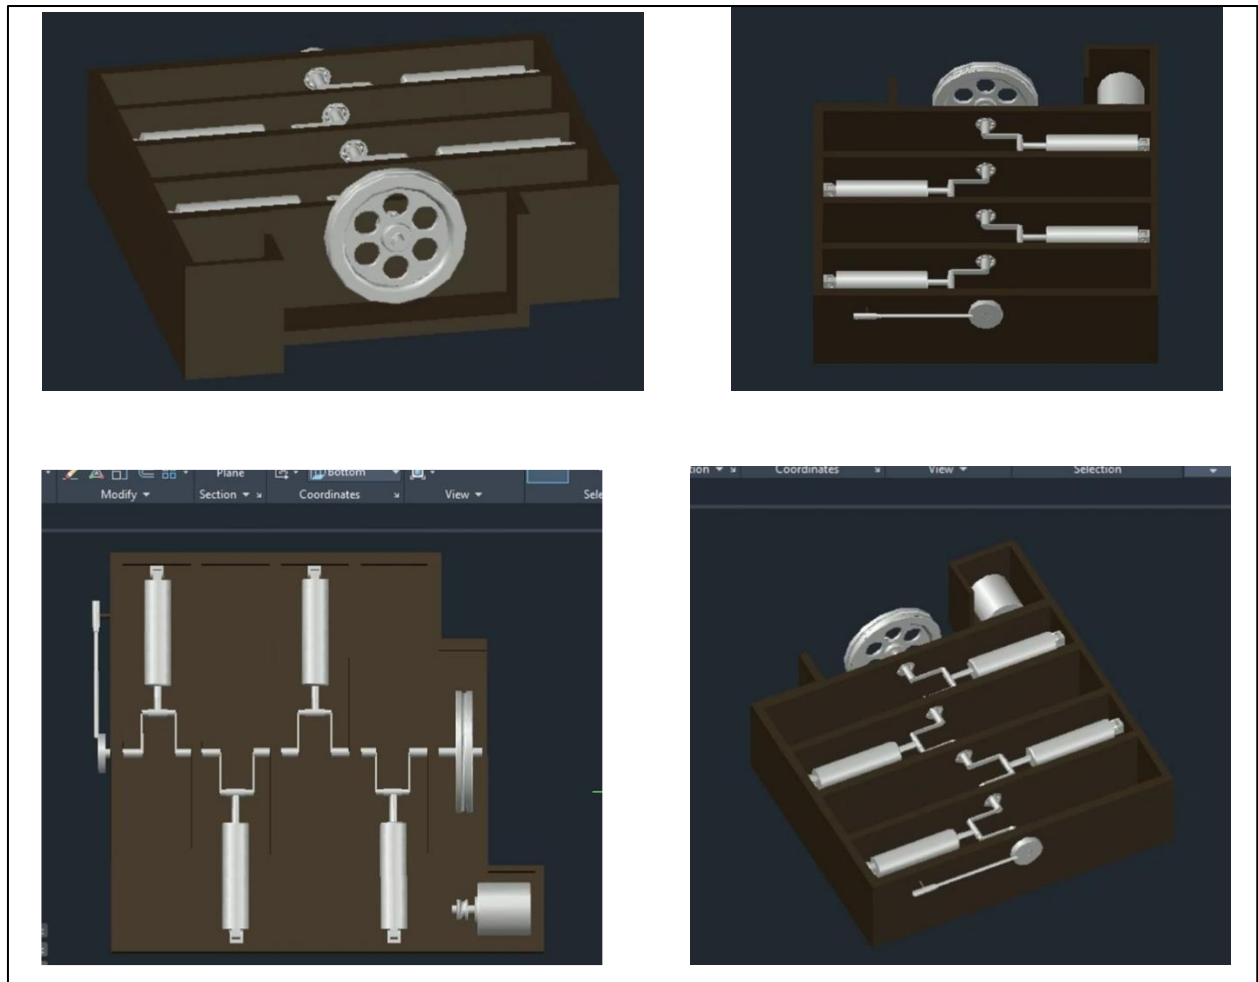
Fully assembled steam engine. Front, rear, bird and isometric view respectively.
